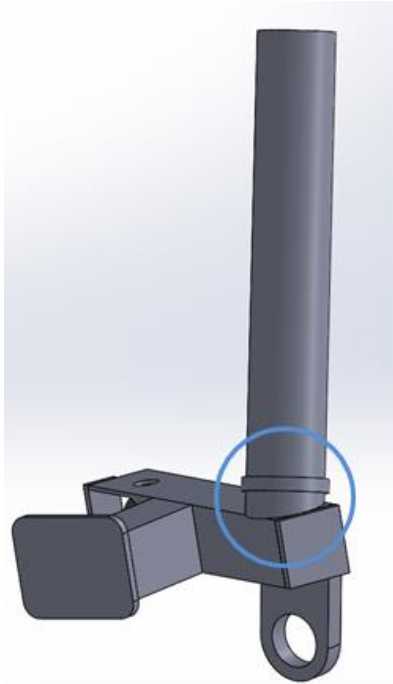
The final design for the wheel axle assembly. The blue circle shows the change made from the initial design that allowed for the removal of all complex angles from the design.
